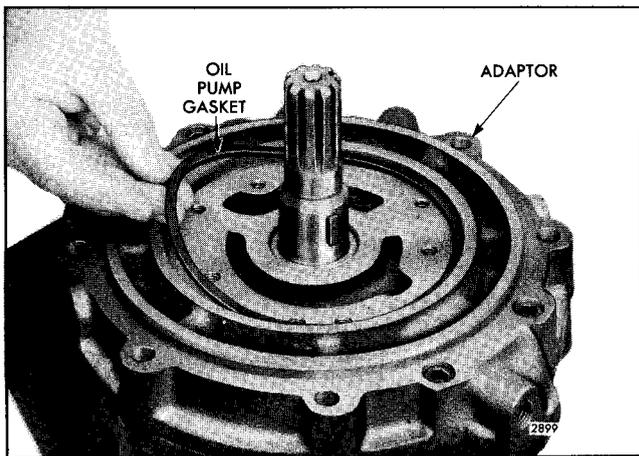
Installing Oil Pump Gasket in Adaptor
